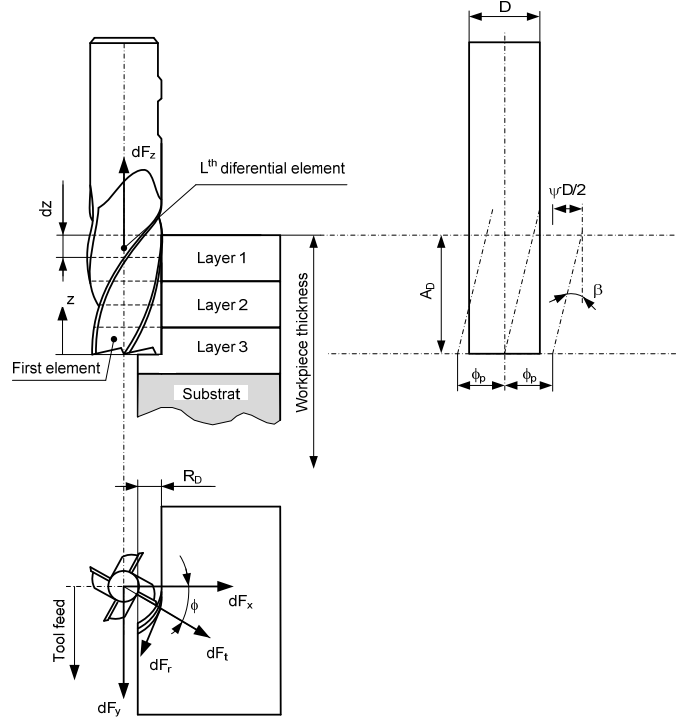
Geometry of helical end milling of multidirectional layered material with relevant cutting forces and tool dissection into differential elements
